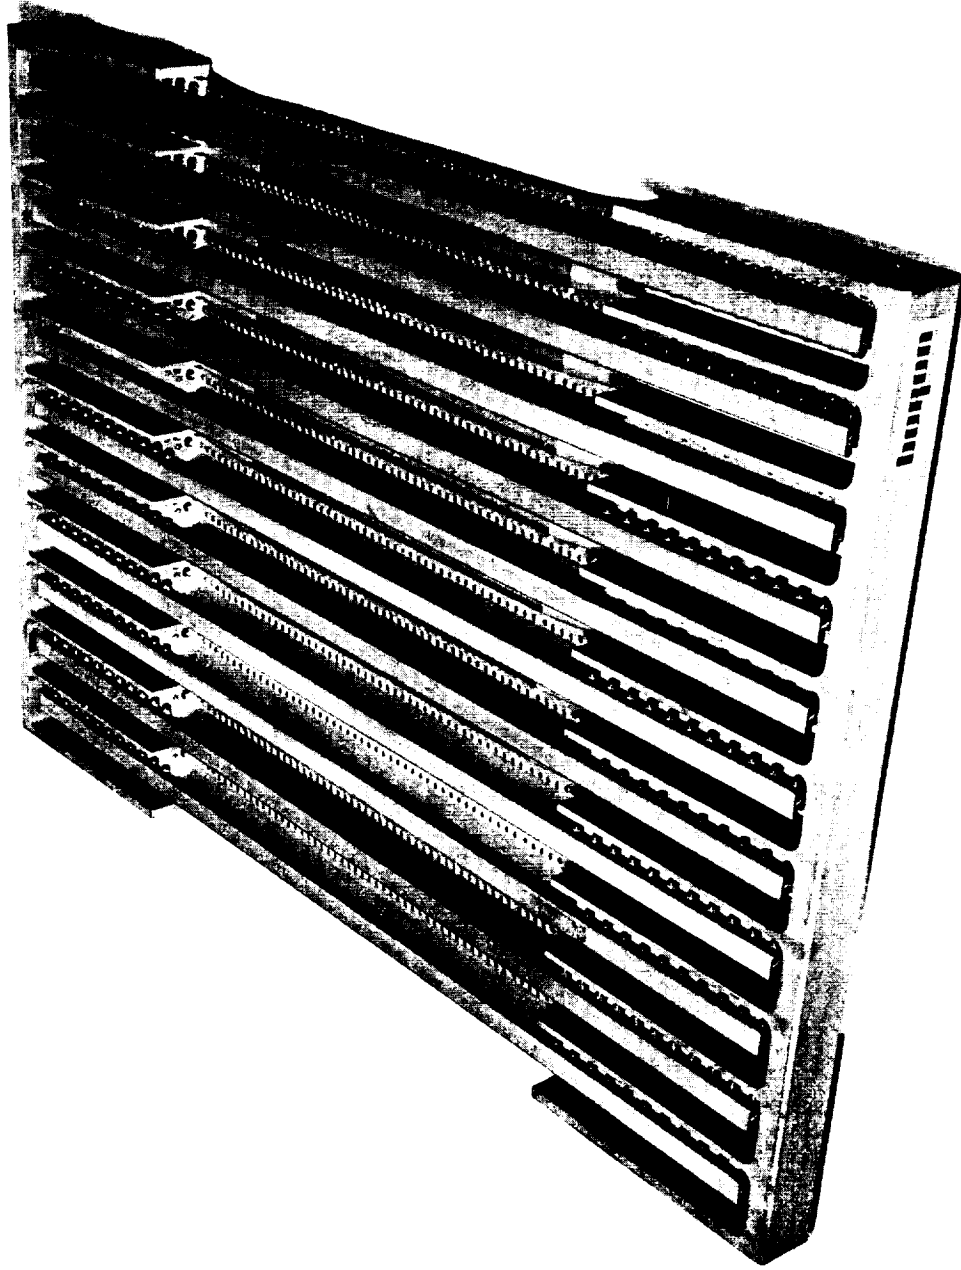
COMPLETED PANEL SHOWING STRINGERS
